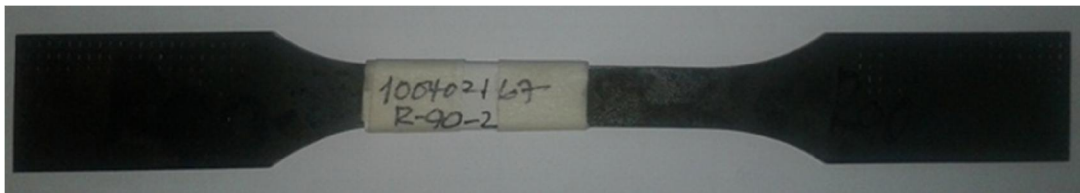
EN-10149-2 steel sheet metal Specimen before Tensile Test
